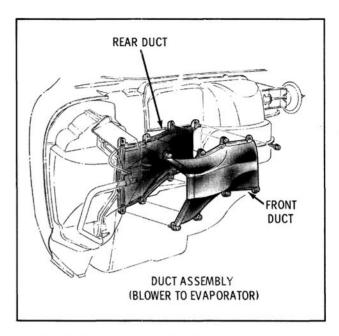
Duct Assembly (Blower to Evaporator) 30 - 31 & 32 Series
